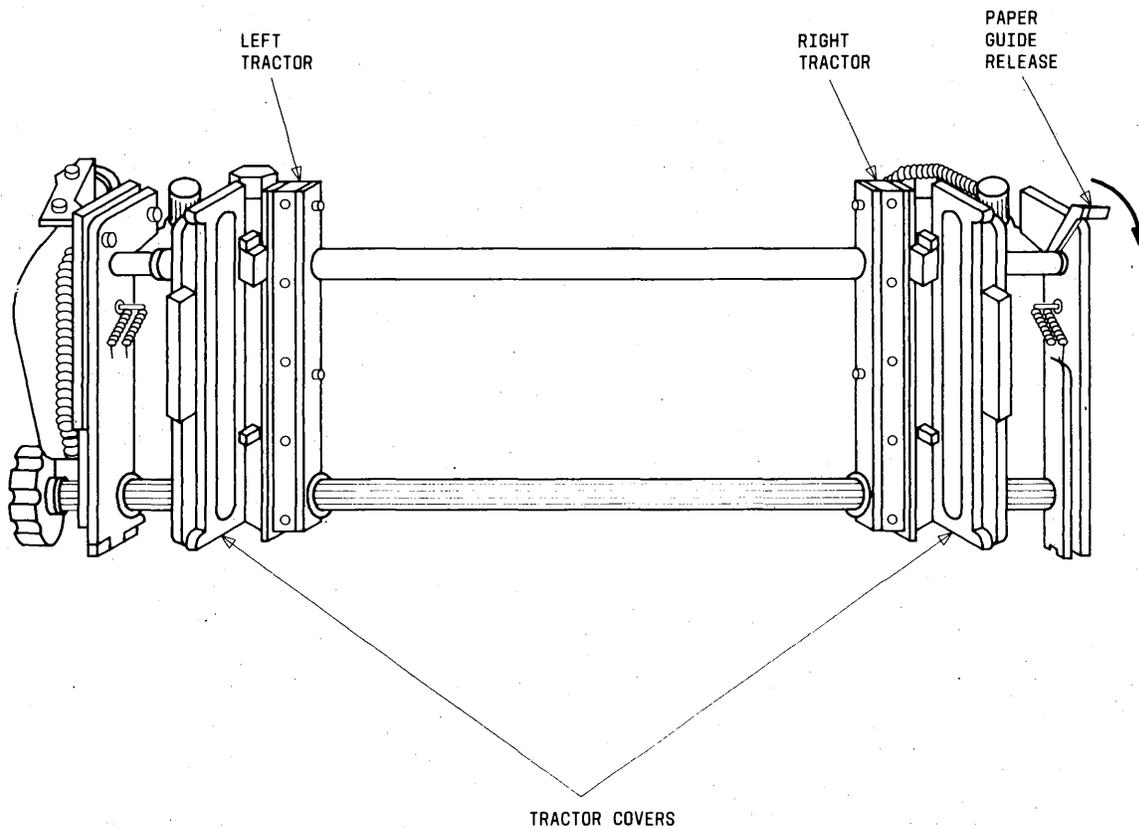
DATASPEED 40 Printer Carriage Assembly (Without Paper)
